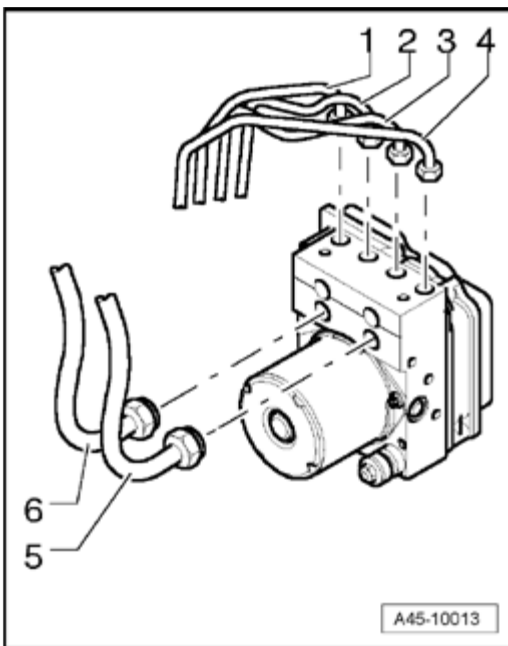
Connecting Brake Caliper & Piston Circuit Lines
